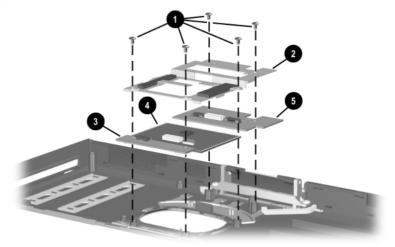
Removing the TouchPad Components on Dual Stick Models
